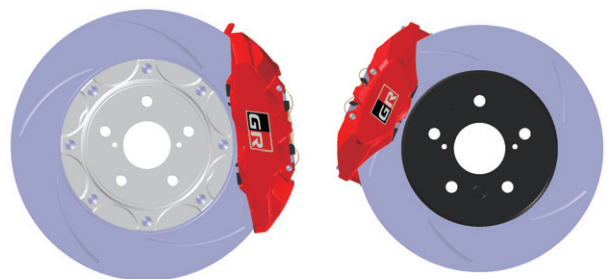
Front Brakes (Left) and Rear Brakes (Right)
